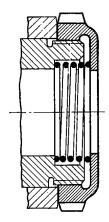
Locking circular nuts by screwed-on washers having a tooth which engages in slot or groove between splines on shaft
